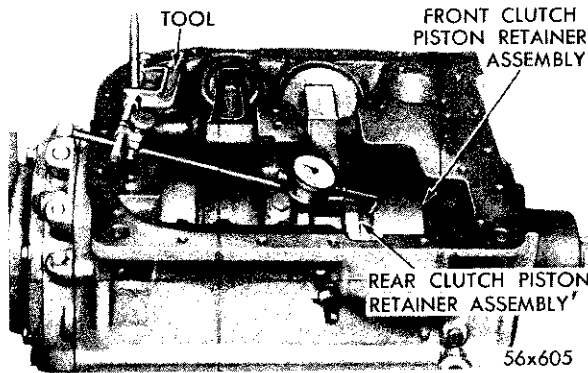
Checking Front Clutch Piston Retainer Assembly End Clearance
